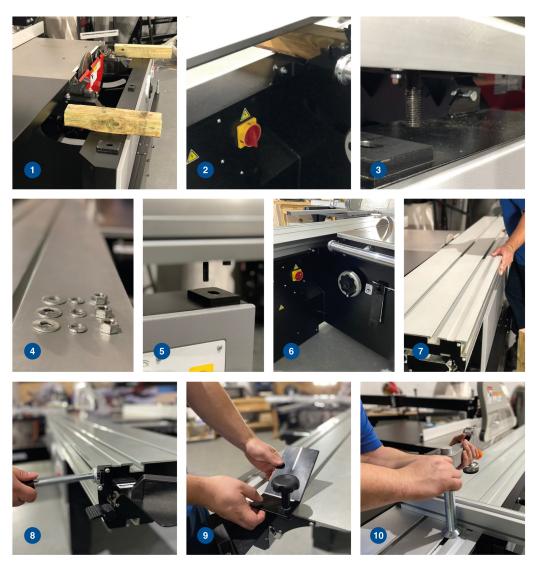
Add two 4x4 wood pieces where the sliding table will be.
